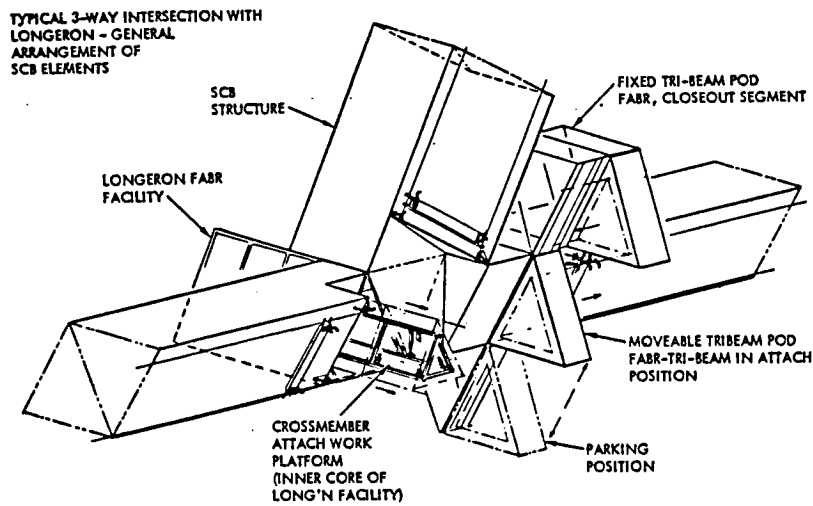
Typical 3-Way Intersection with Longeron
